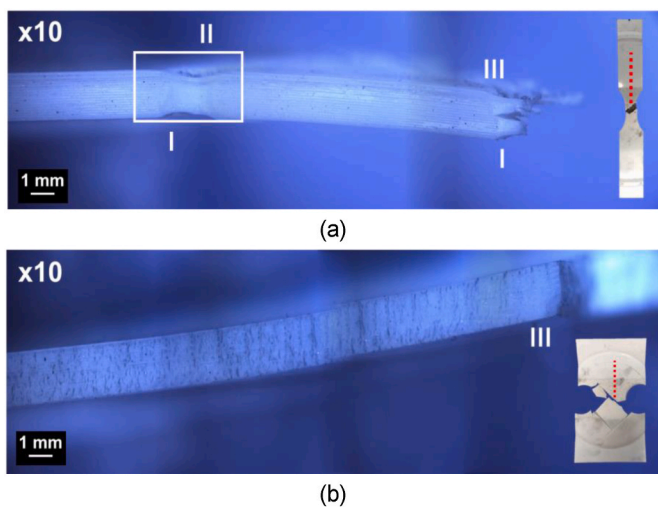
Fractography of PETG Nakajima specimens: (a) TS and (b) PS.
